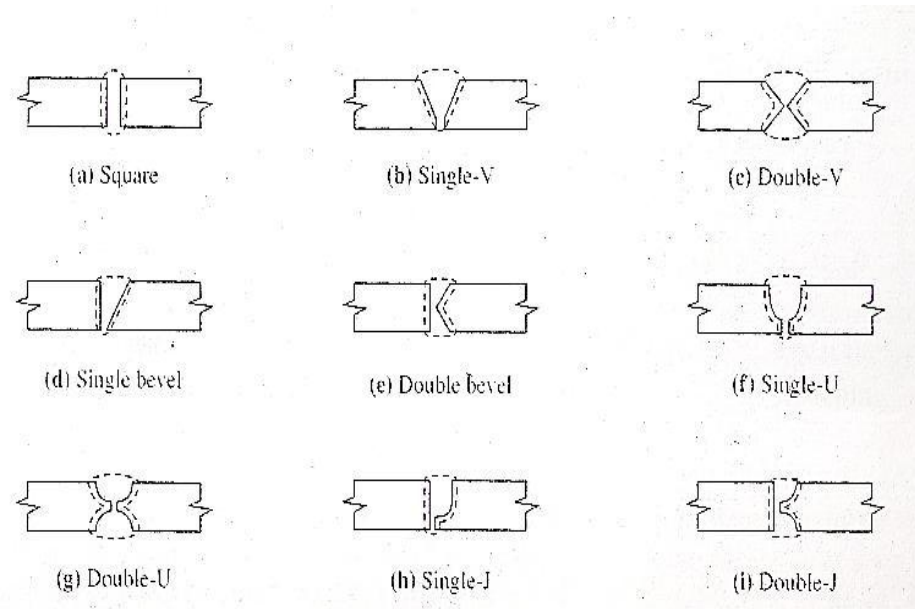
Edge preparations for groove-welded butt joints⁷
